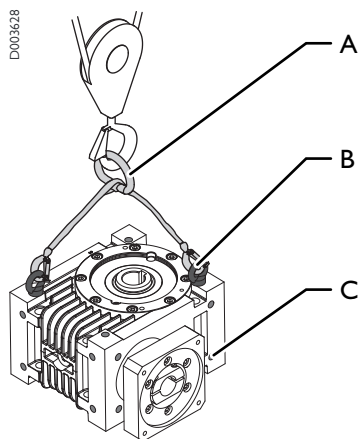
Attaching the slings: Güdel gearbox unit
